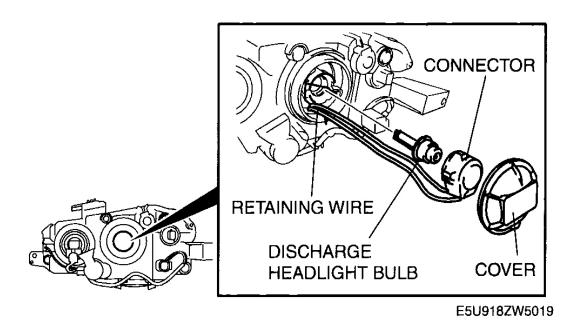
Identifying Discharge Headlight Bulb Courtesy of MAZDA MOTORS CORP.
